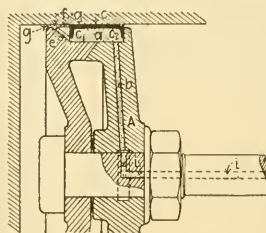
INTERNAL COMBUSTION ENGINE PISTON WITH FUEL DELIVERY THROUGH THE PISTON RINGS.
